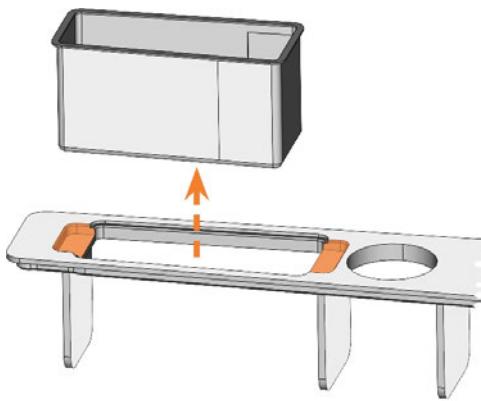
REMOVING THE STRAINER BASKET (RECESSED SURFACES COLORED ORANGE)
